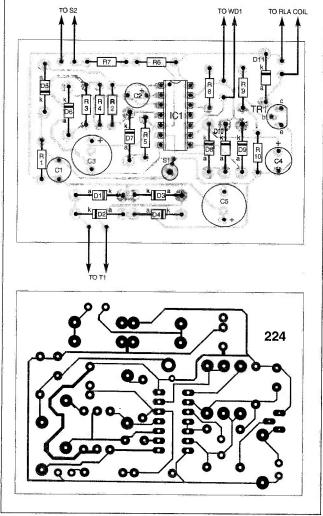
Full size p.c.b. layout for the Ironing Board Saver.
